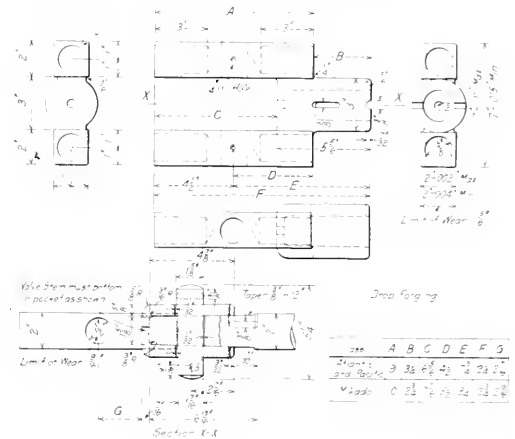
Valve Stem Crosshead of Pennsylvania Locomotive
